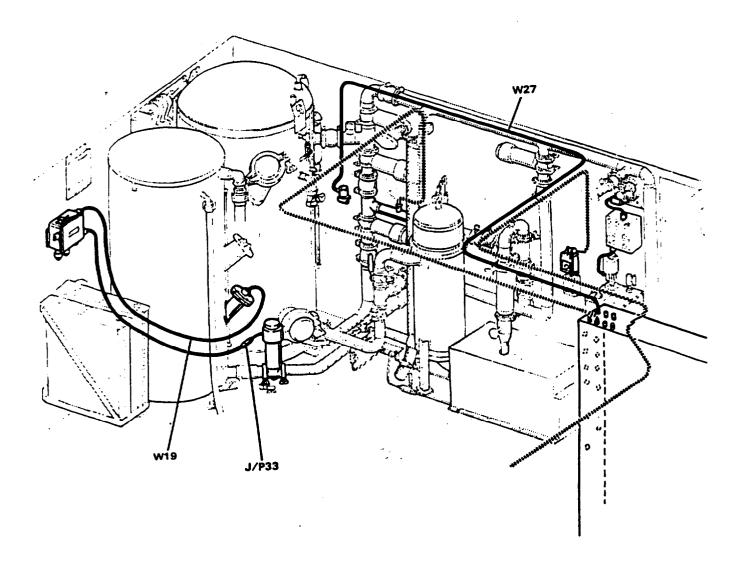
Electrical Installation (sheet 6 of 8) Primary Harness, Back Wall, W-33
